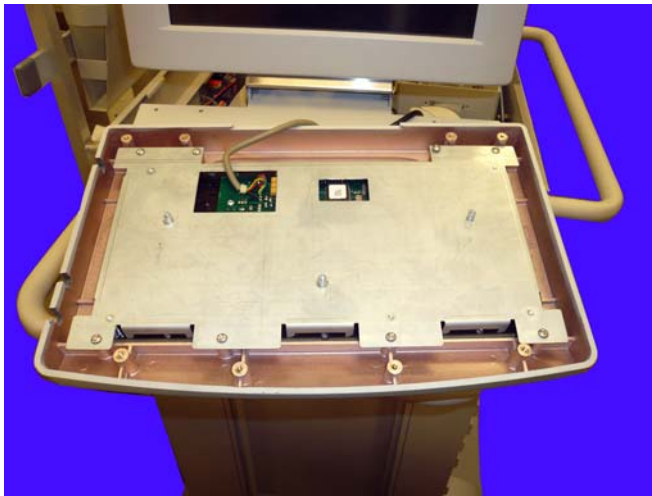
Flip the keyboard over and place it on the keyboard table
